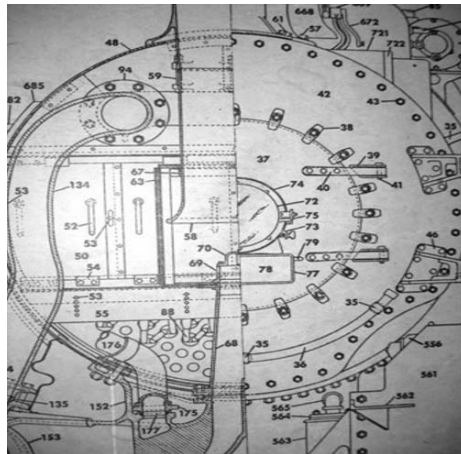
Locomotive drawing (Source: Acámbaro’s Museum)
